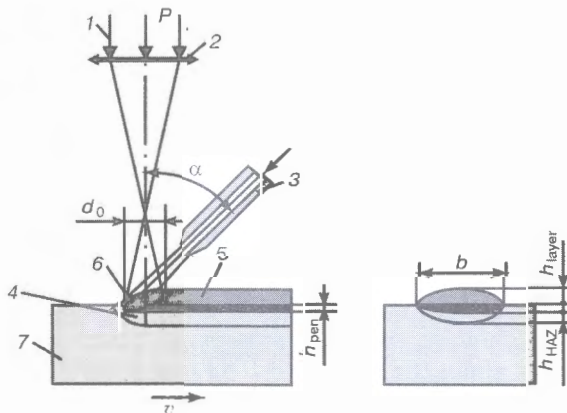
Scheme of the laser powder surfacing process: 1 — laser beam; 2 — focusing lens; 3 — gas-powder mixture; 4 — HAZ; 5 — deposited layer; 6 — weld pool; 7 — sample (h_{pen} — depth of penetration)
